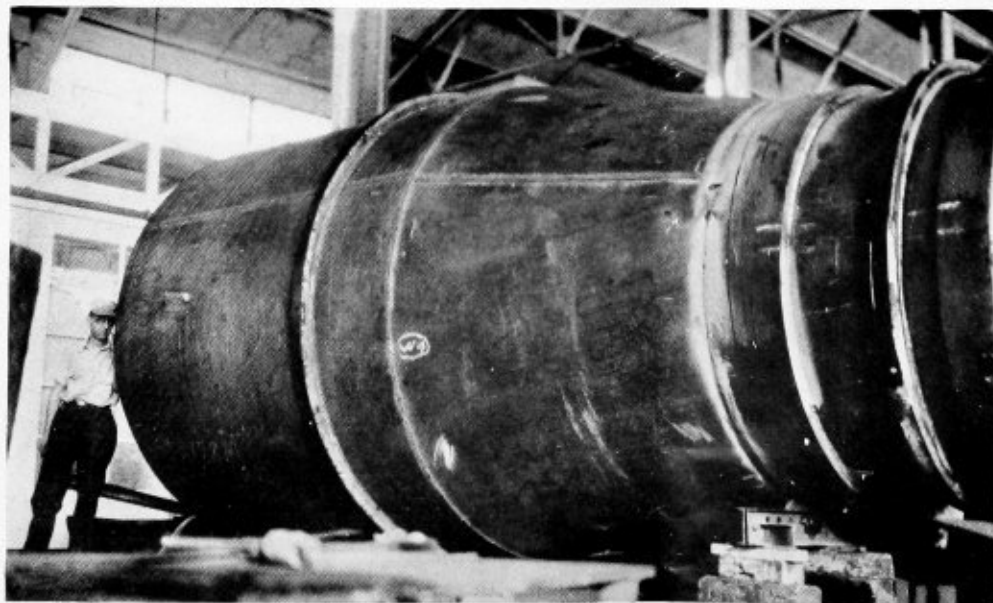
A close-up view of the shell of the San Fernando penstock showing welded girth seams and longitudinal butts
